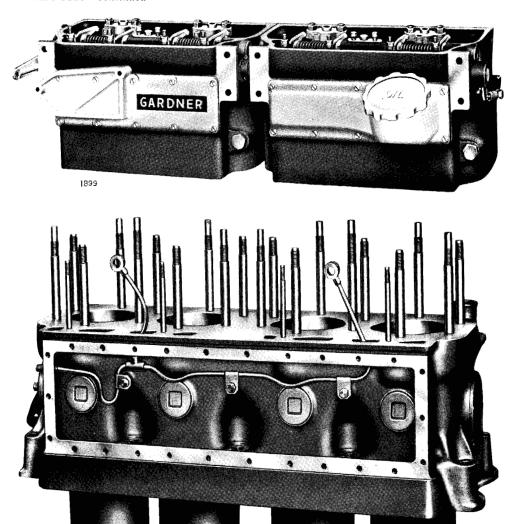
CYLINDER BLOCK AND CYLINDER HEADS
